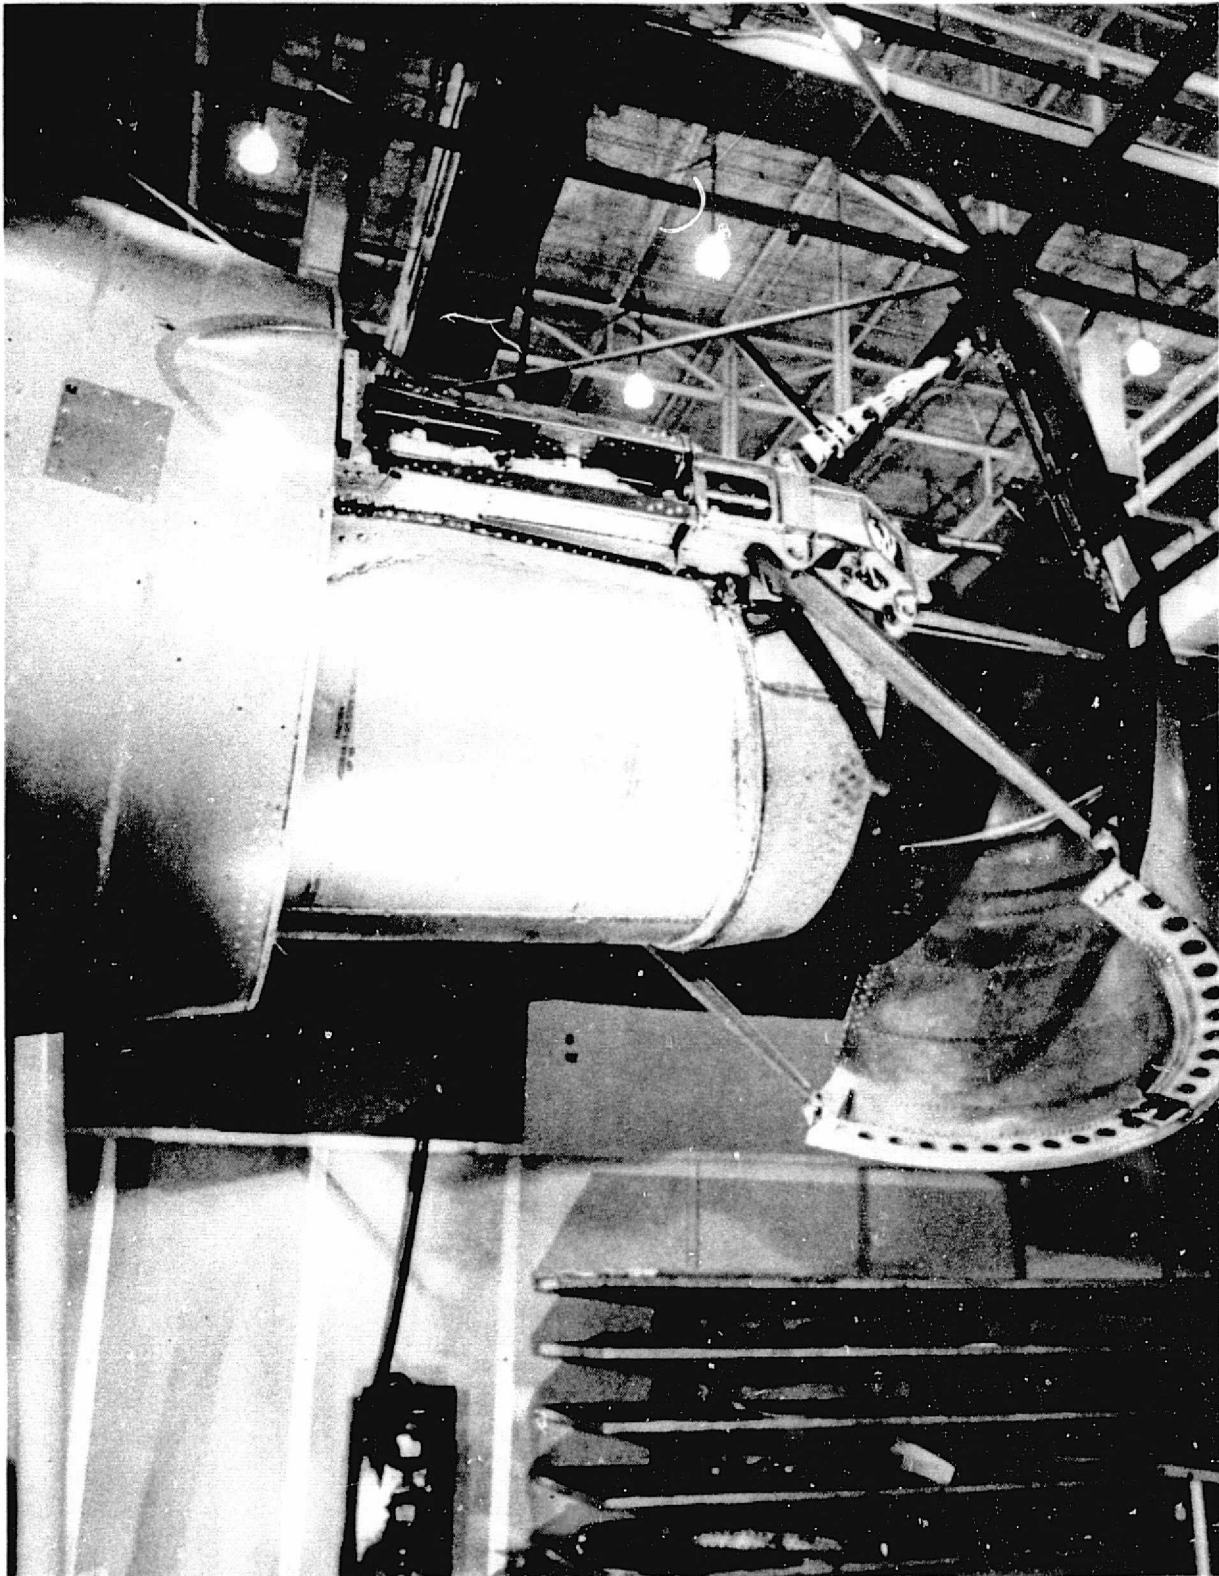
THRUST REVERSER, LINKAGE, ACTUATOR AND SUPPORT STRUCTURE
